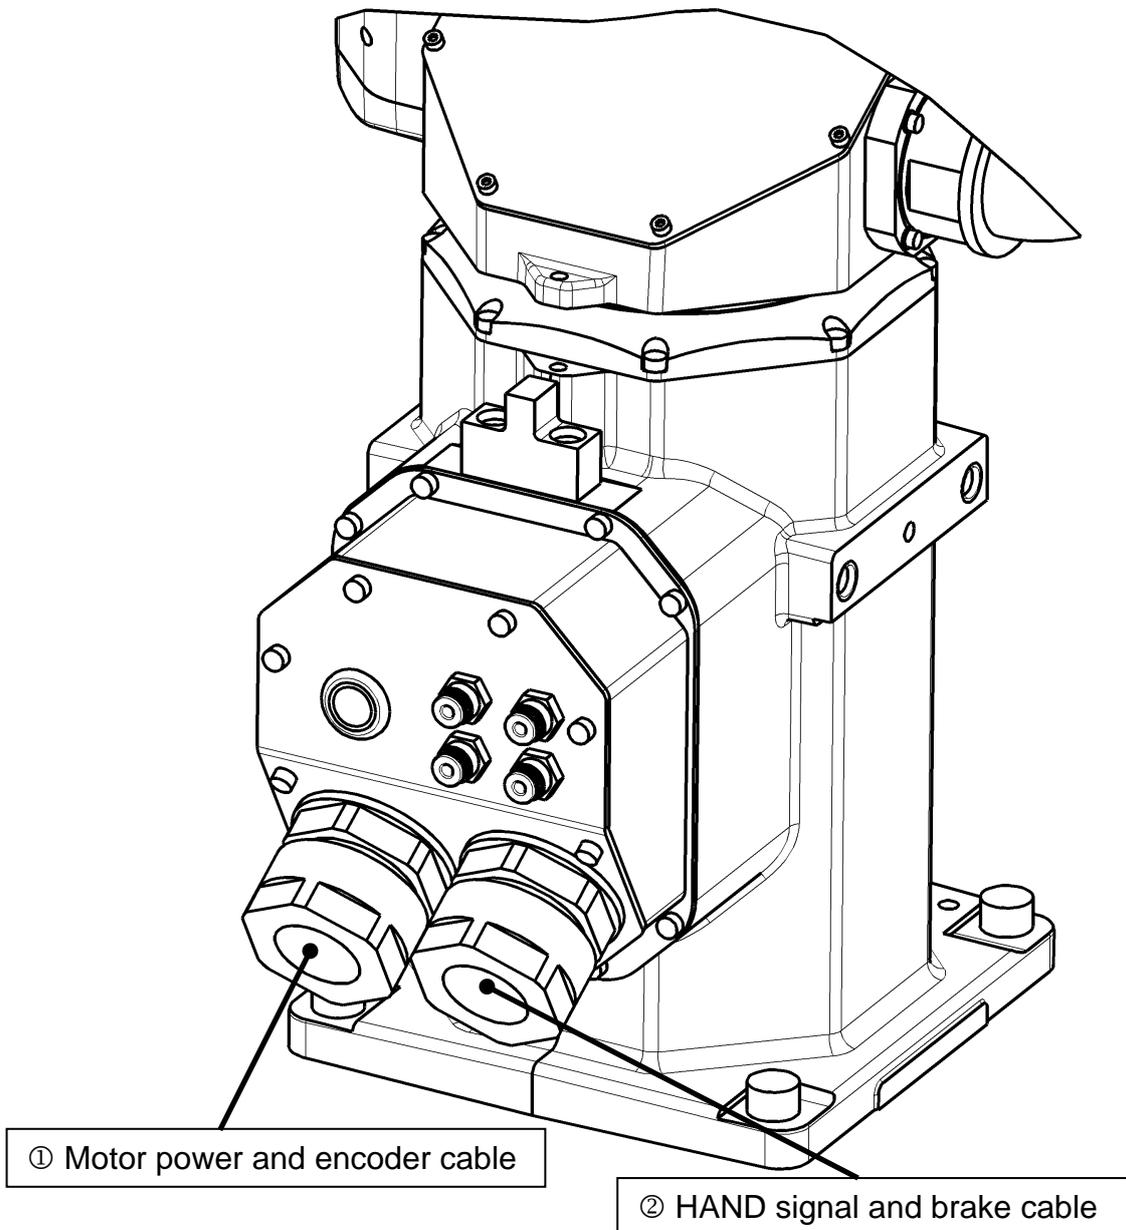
Robot side connector arrangement (TSL3100E)
